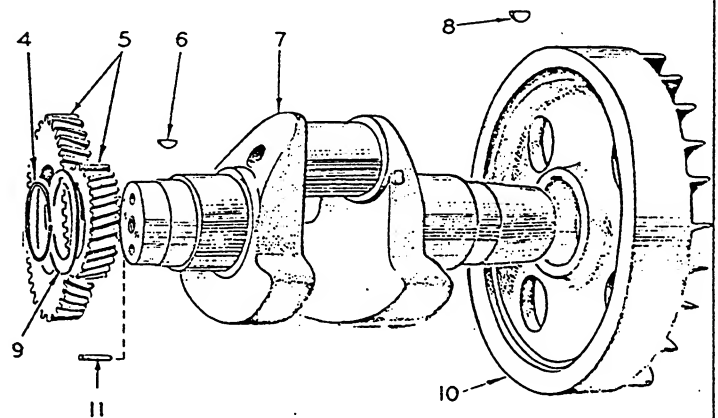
FIG.C-CRANKSHAFT AND FLYWHEEL GROUP
